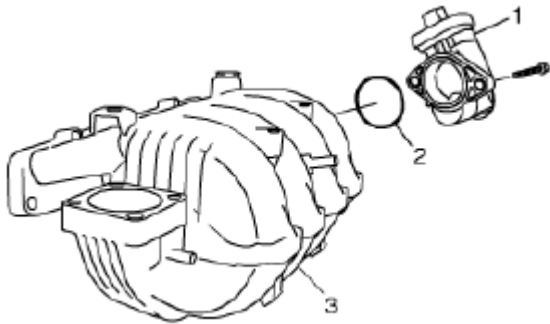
Identifying IMT Valve Actuator & O-Ring
